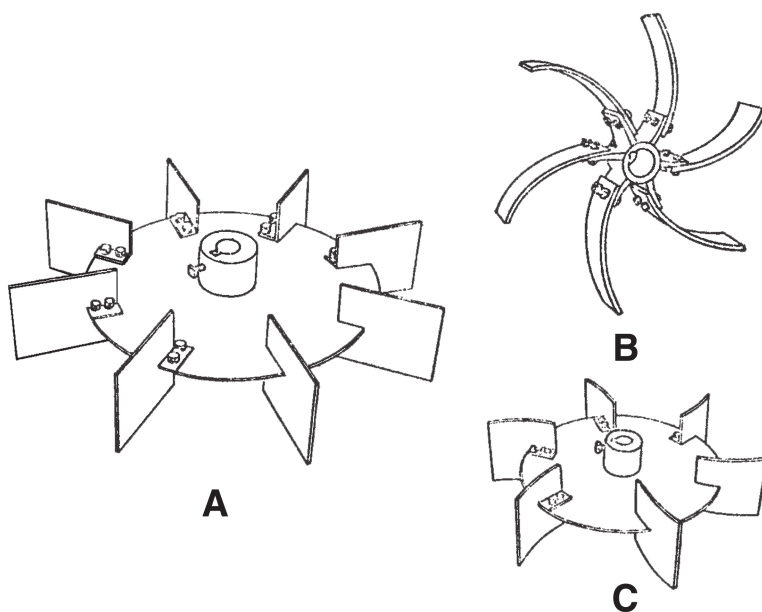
Typical Radial Turbine Impeller: (a) flat blade; (b) spiral backswept; (c) curved Blade (9).
